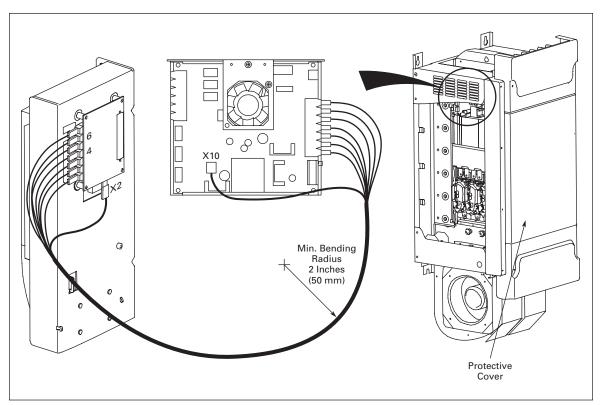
Connecting the Power Supply and Control Cables to the Control Unit, FR10 and FR11
